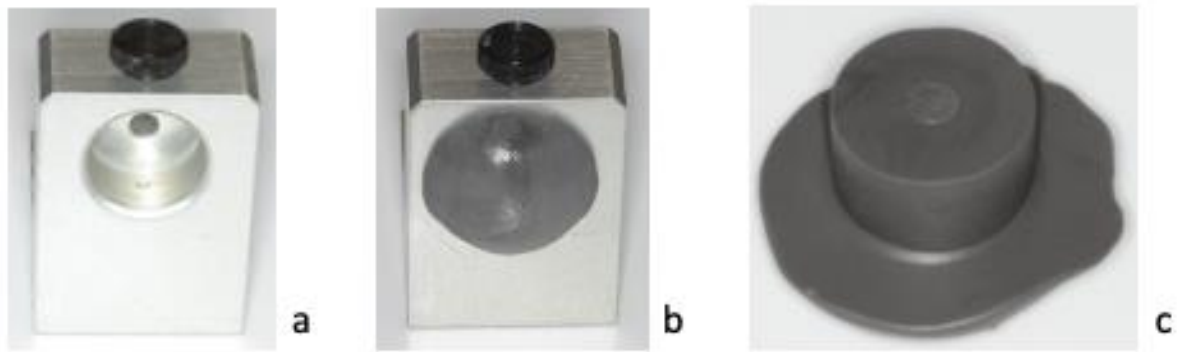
a) The Instron machine's stainless steel frame holds the specimens. b) Putty impression material was inserted into the socket in the stainless-steel frame. c) Putty impression of the socket of the stainless-steel frame
